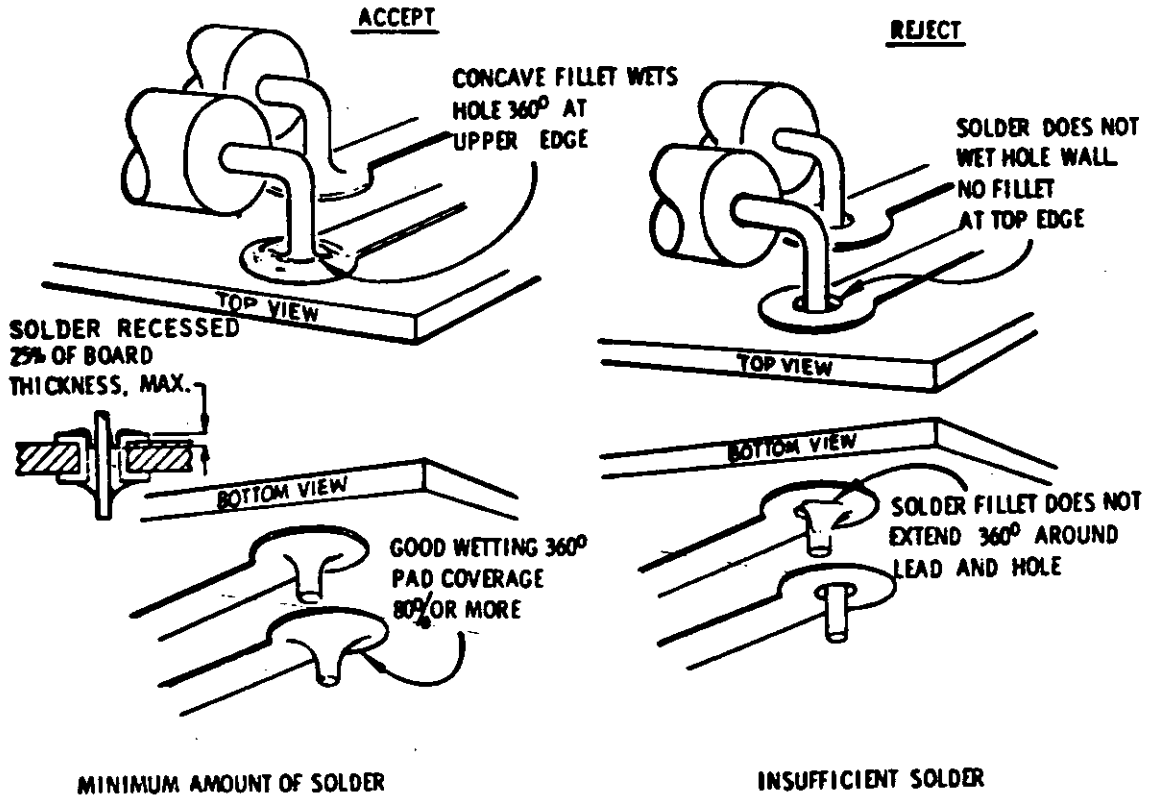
Plated-thru holes - amount of solder on joint.
